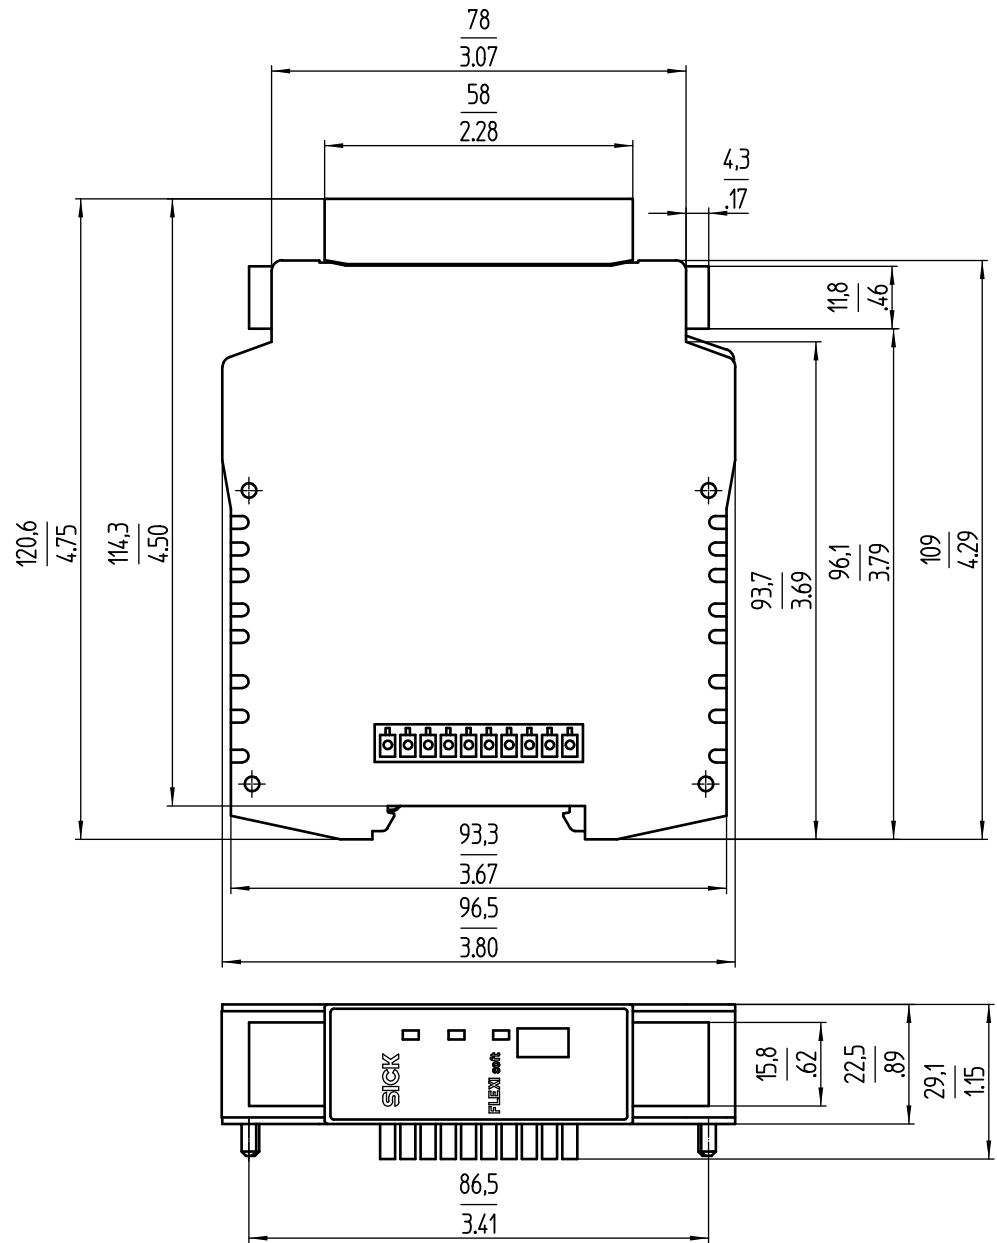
Dimensional drawing for FX3-GEPR (mm/in)
